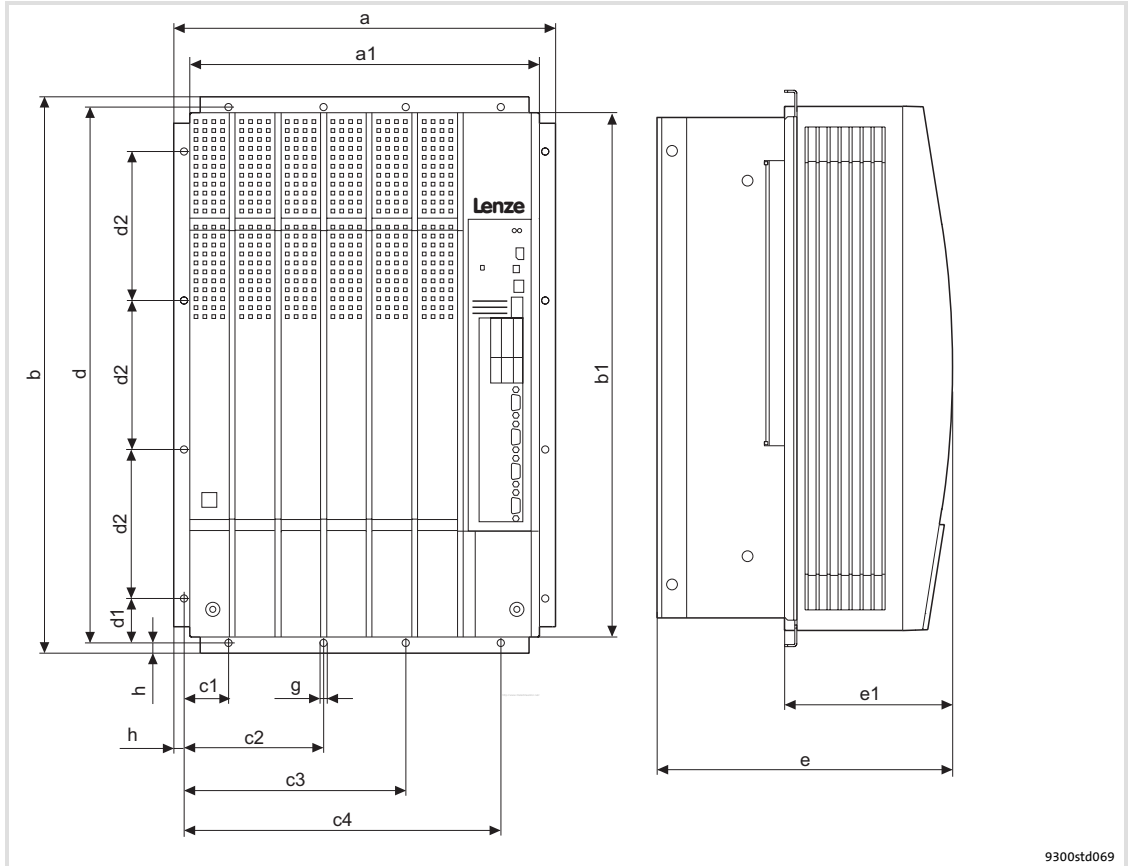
Dimensions for thermally separated mounting 45 kW
